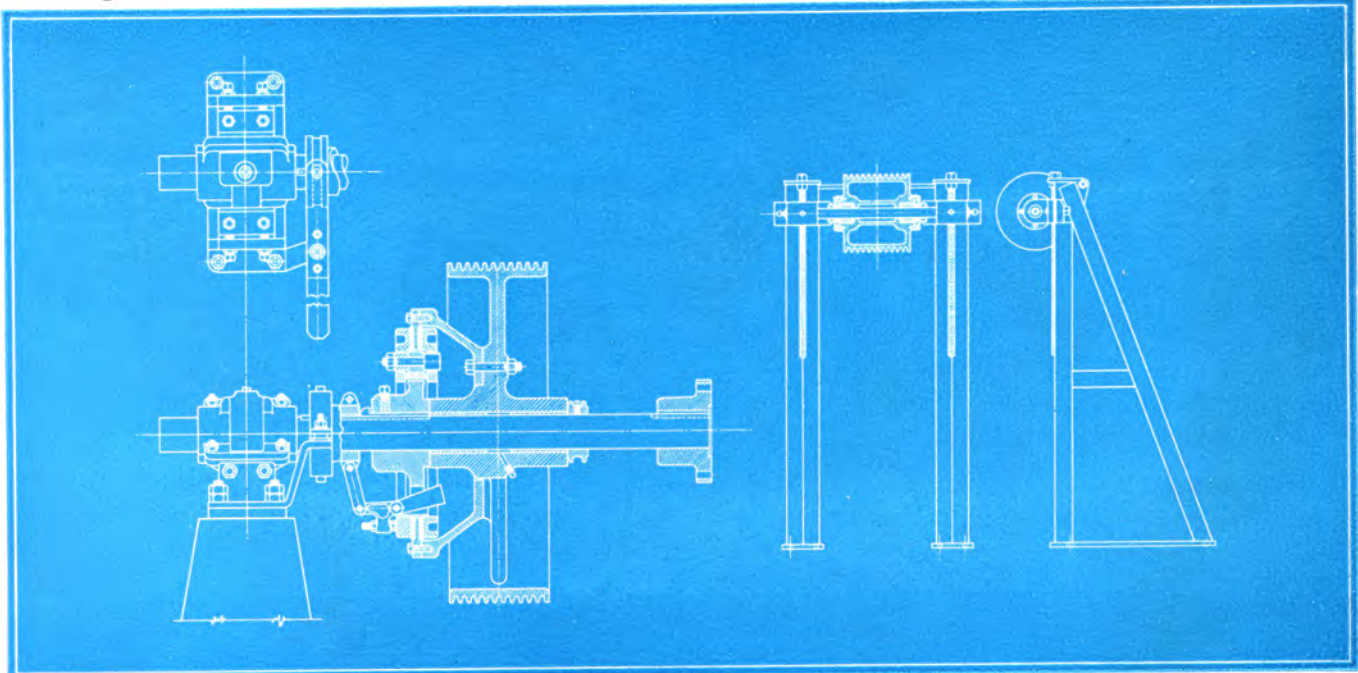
CLUTCH shaft for single cylinder gas engine drive and usual tightener for same
